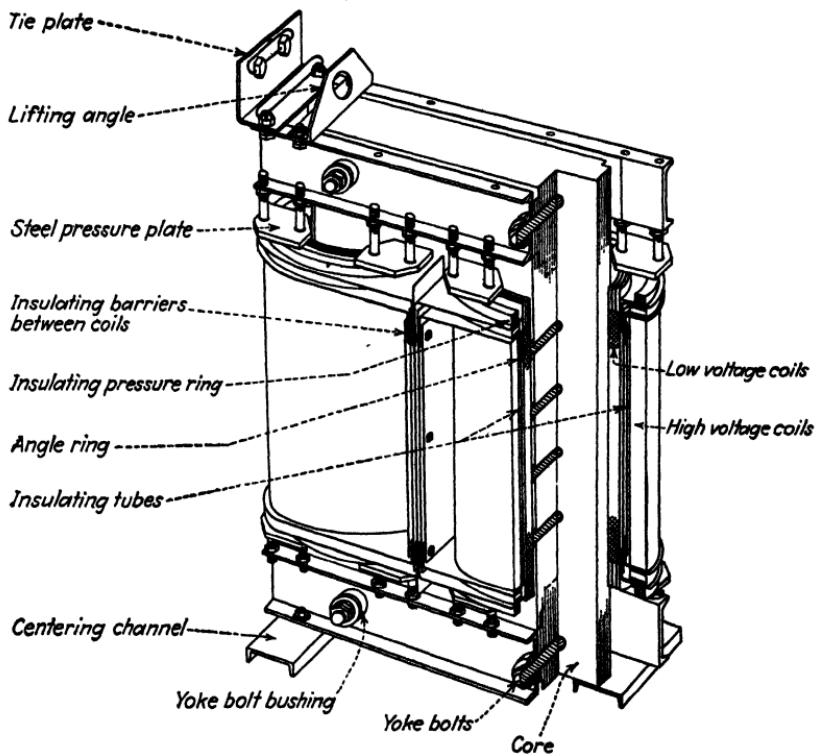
Cutaway view of core-type power transformer. (Courtesy of Westinghouse Electric & Manufacturing Co.)
